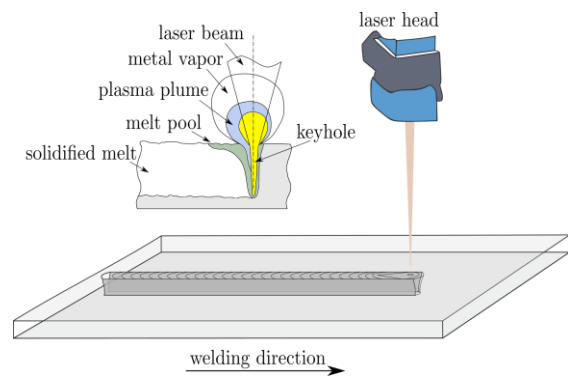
Schematic bead-on-plate laser beam welding process according to [4]
